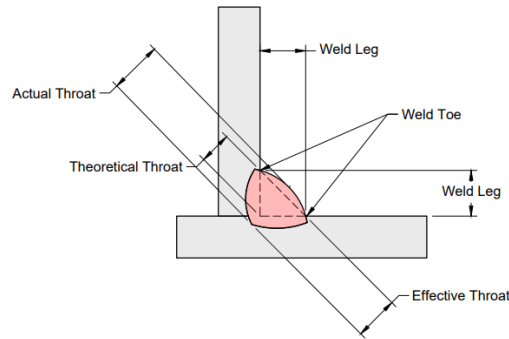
; A cross sectional diagram of an oversized fillet weld, Source ; openwa.pressbooks
